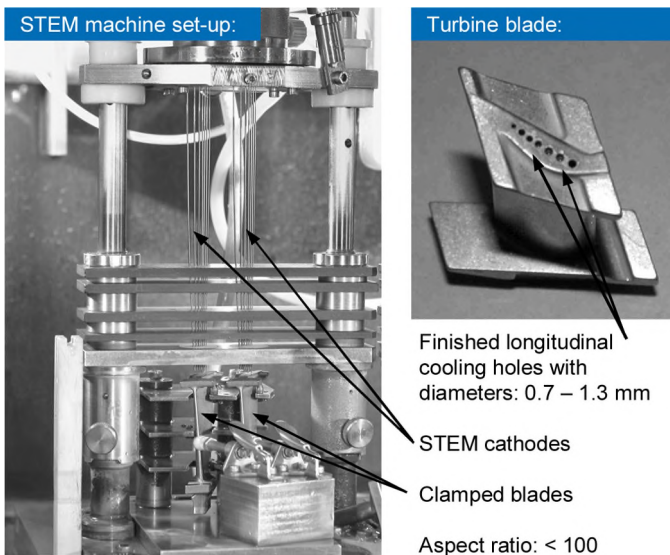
Machine set-up for STEM drilling of turbine rotor blades and application example [62].
